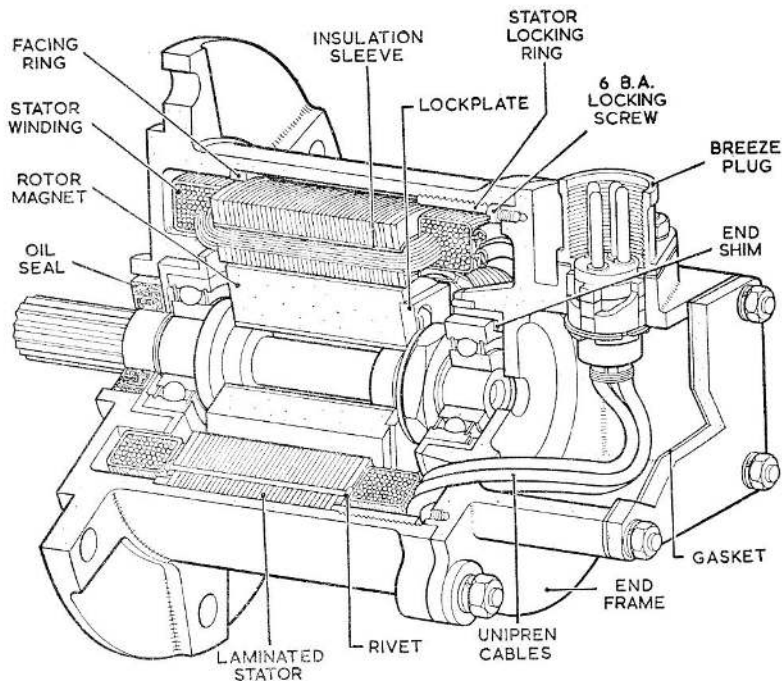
Sectional view of generator, Rotol, Type SNA/23.
